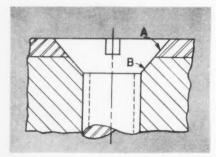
The usual method of assembling thin parts to castings is shown herewith and is ordinarily shown thus on drawings.
